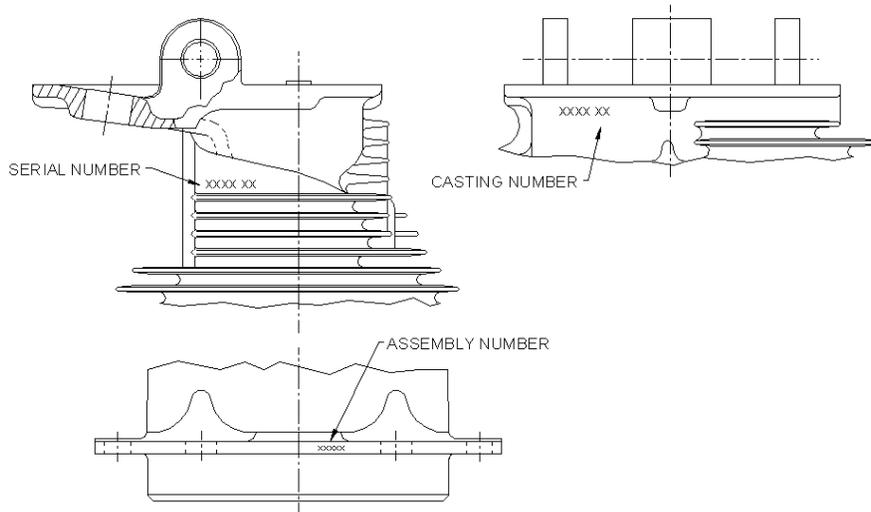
Marking Locations for AEC65314 Cylinder Assembly
